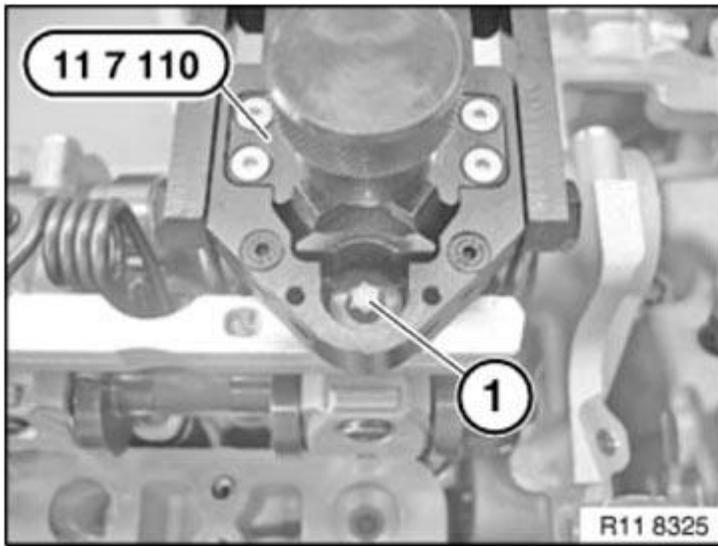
Identifying Special Tool 11 7 110 And Screws
